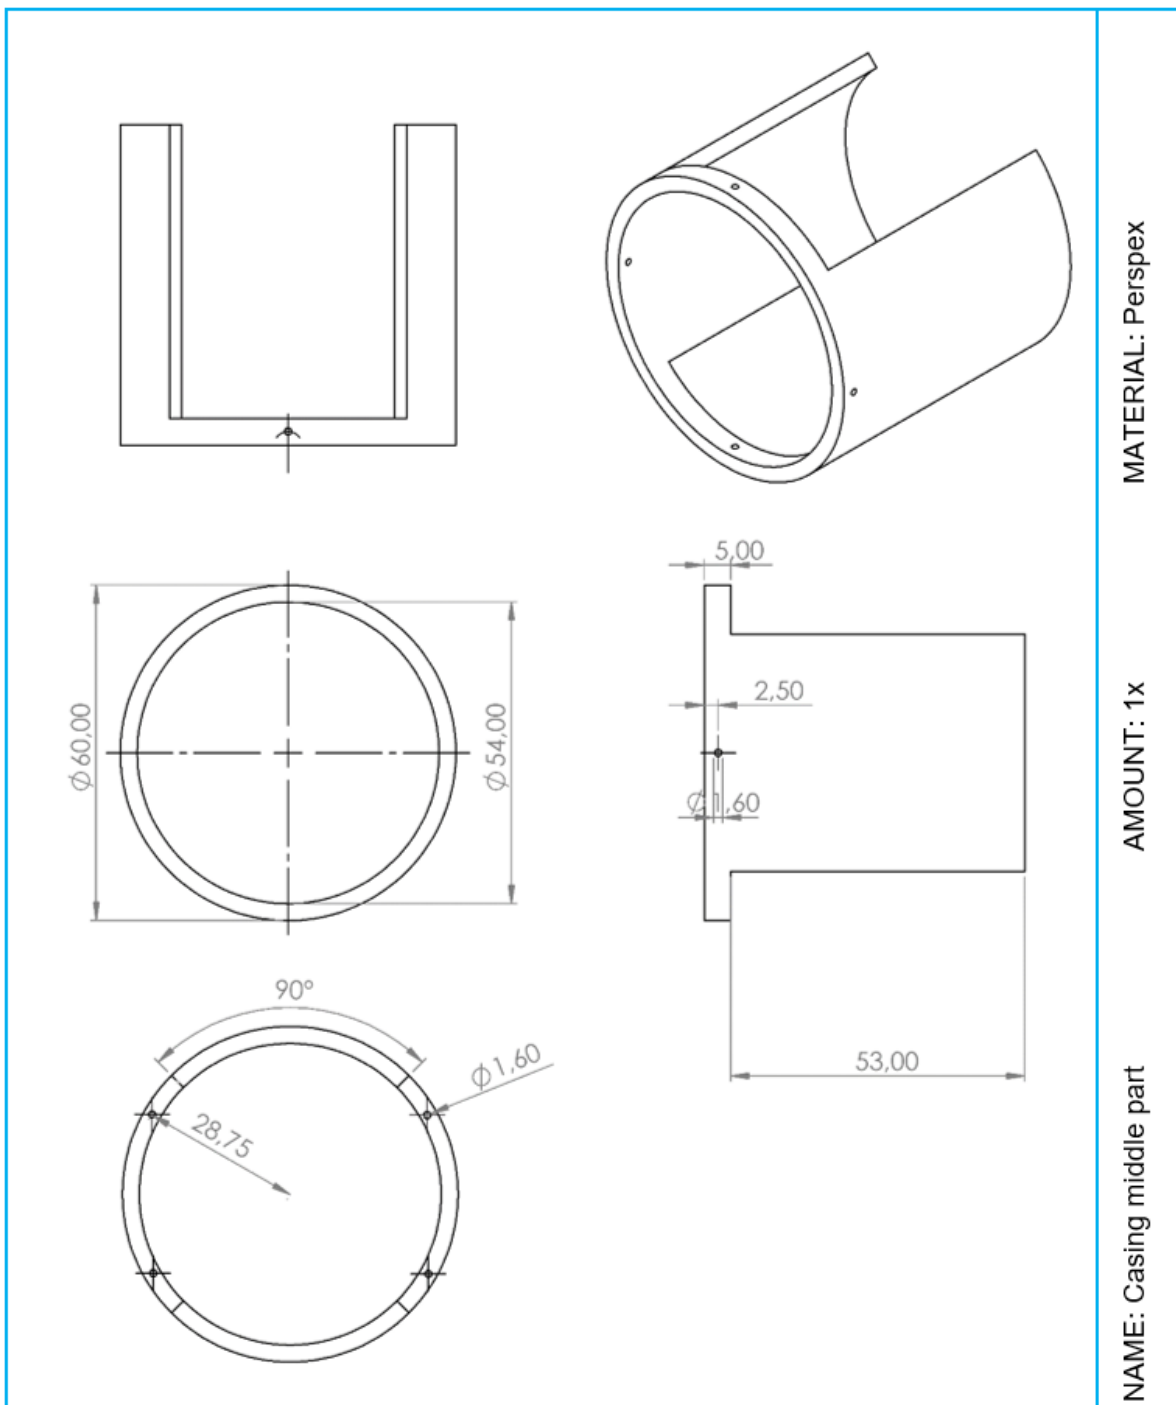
Construction drawings of the casing middle part - Machined prototype
